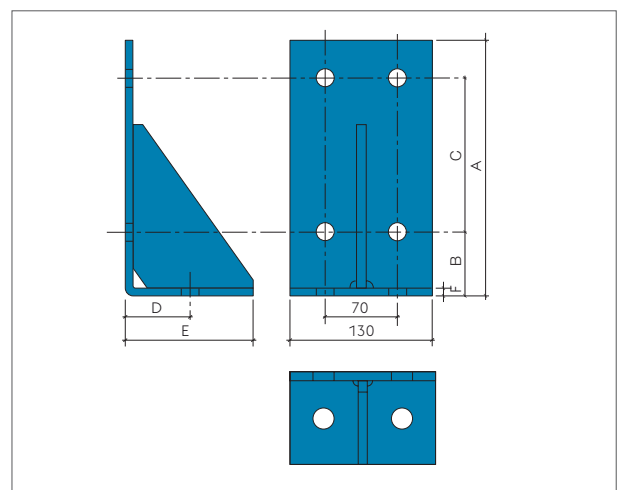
BOC cleats designed for bolting to the primary structure / sections 302 - 452
